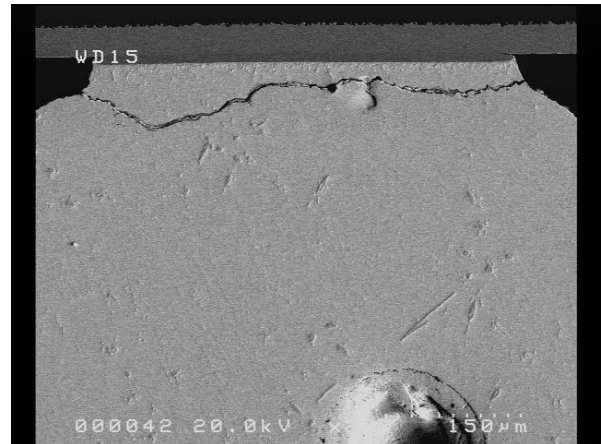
Component Side Failure with SAC305 Solder on OSP Finish, 170 T_g Board
